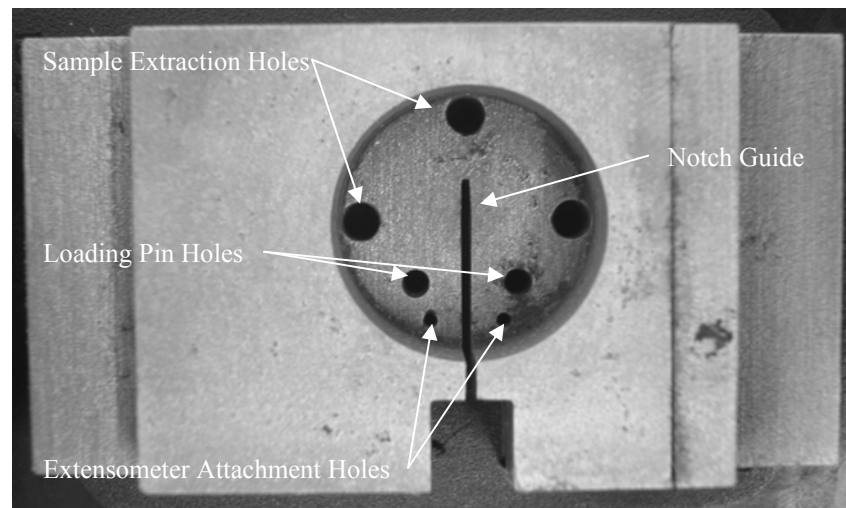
Jig for the preparation of disk-shaped compact specimens.
